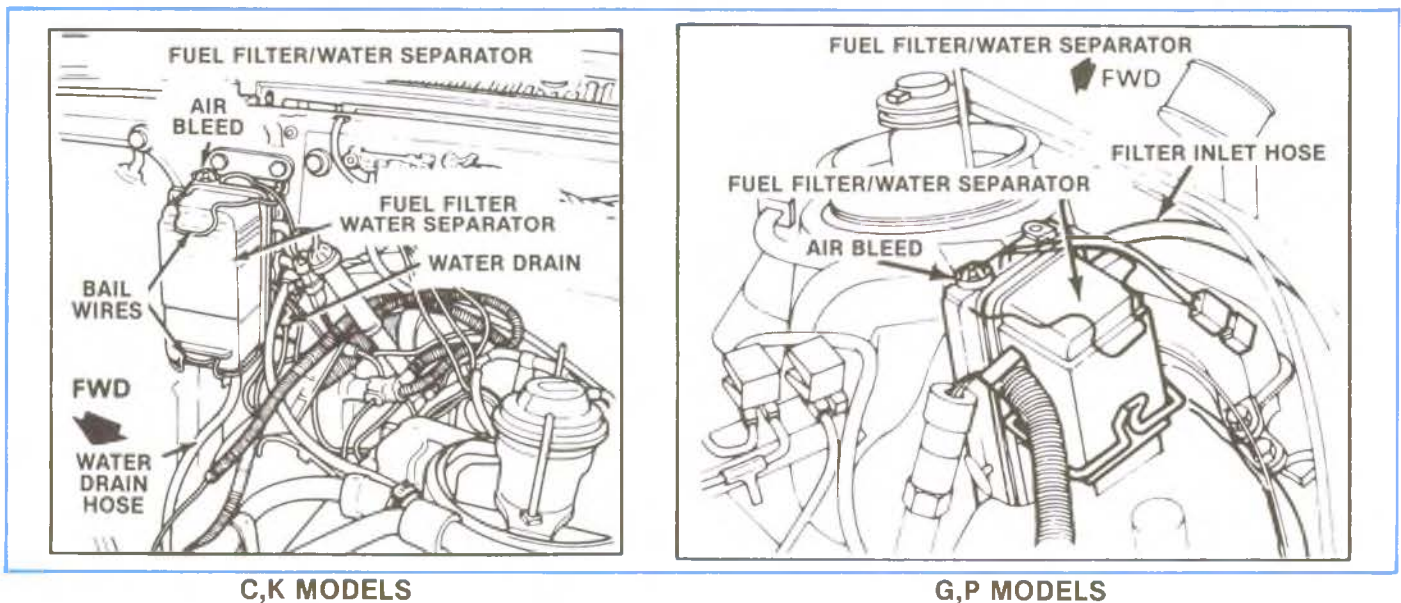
, Electrical Connections, Fuel Filter/Water Separator.
